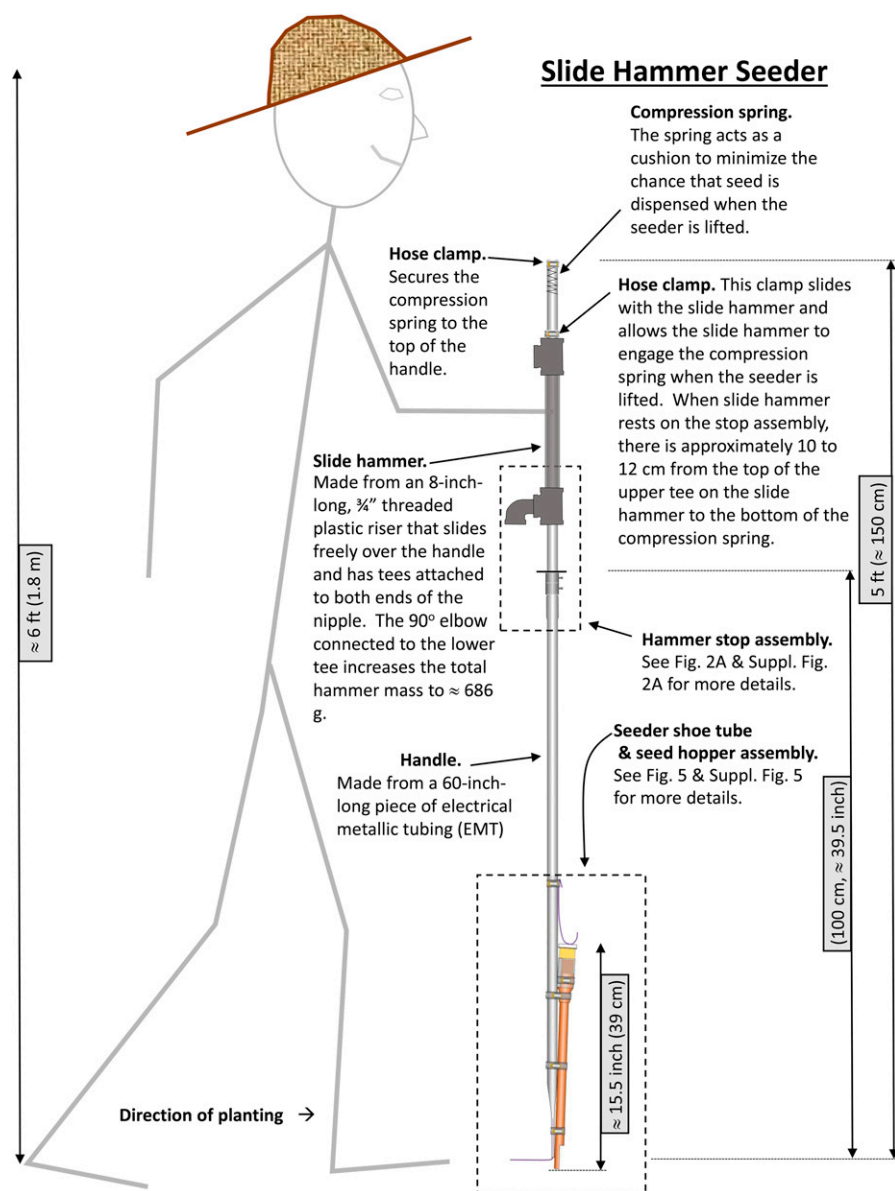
The slide hammer seeder illustrating the various components that are about to scale; 1 inch = 2.54 cm, 1 ft = 0.3048 m. See Supplemental Fig. 1 for enlarged, color version.
